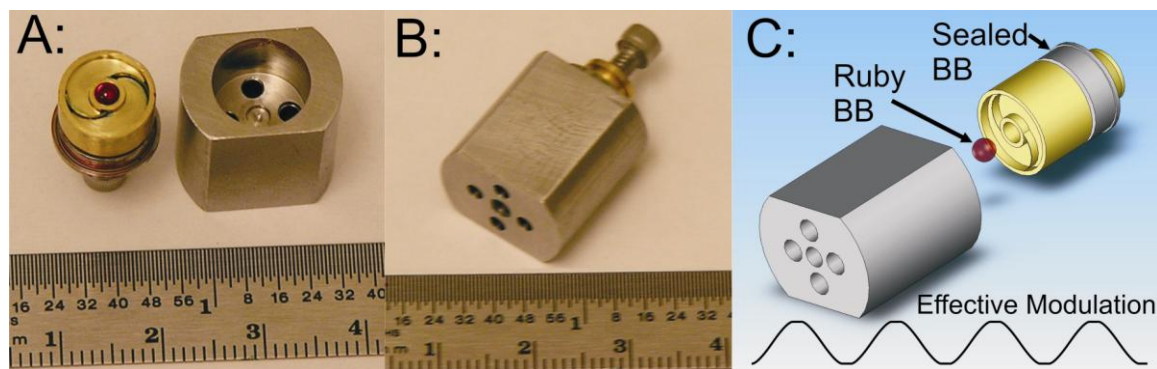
Clipped triangle valve. A: Shows the inner drum with curved rotors and center fixed ruby ball bearing. B: Exterior view of valve. C: Exploded model of assembly. The effective modulation is that of a slight LPF clipped triangle wave.
